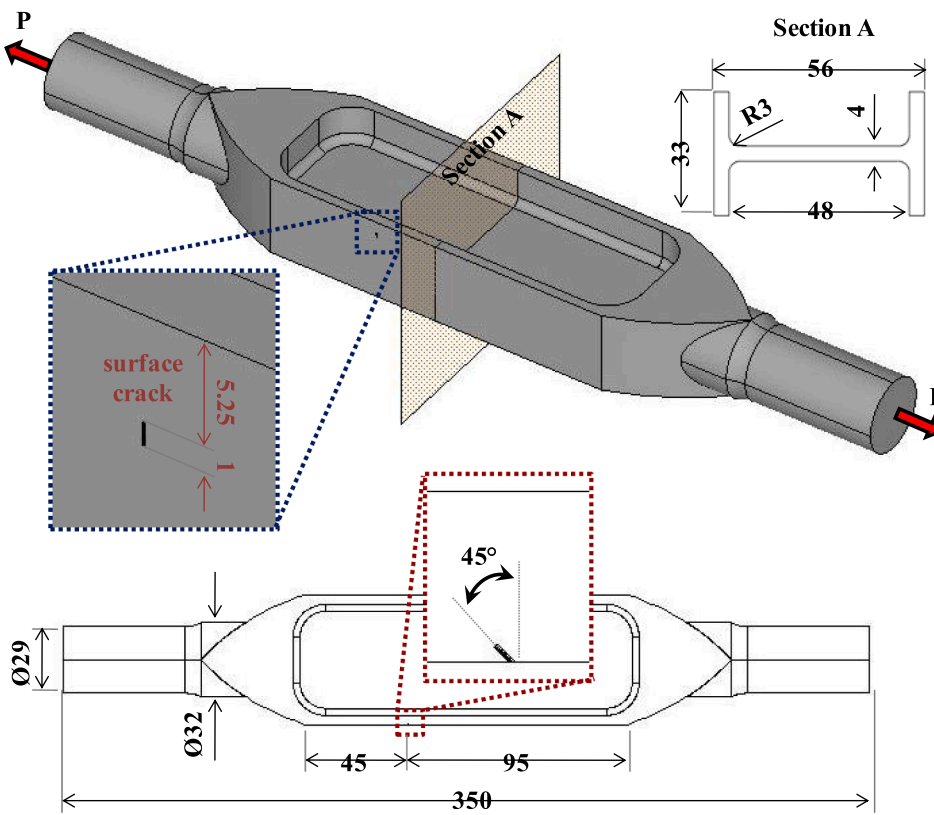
Details of the H-shaped specimen geometry and its dimensions.
